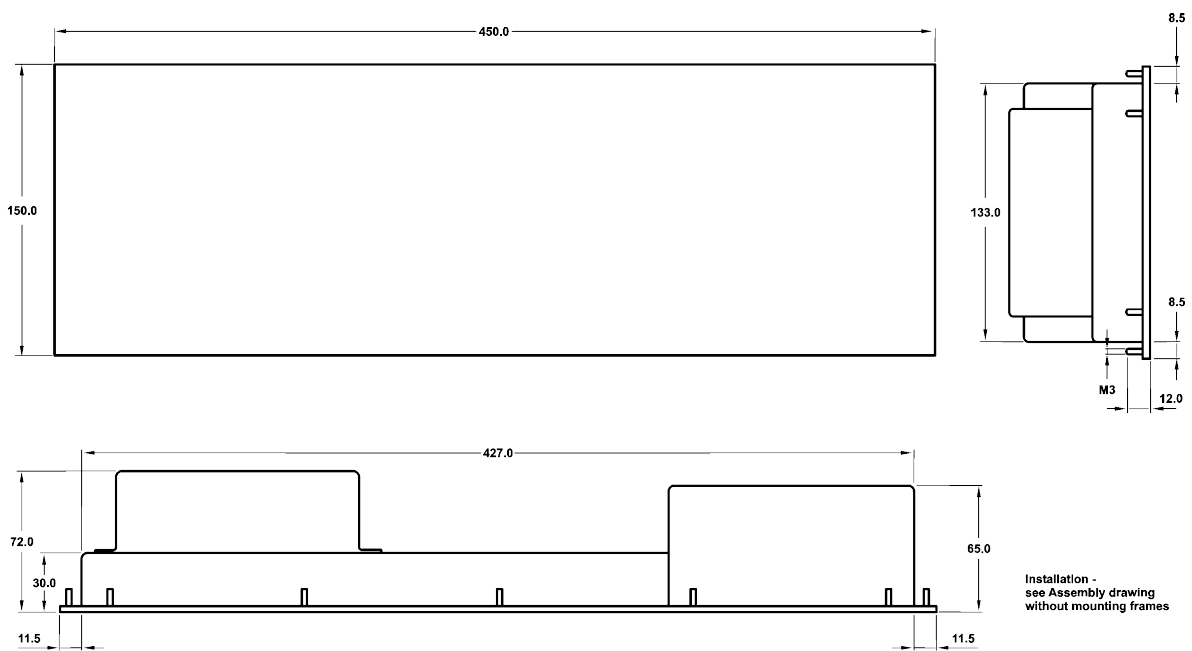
Transas ES3 dedicated keyboard. Dimensional drawing
